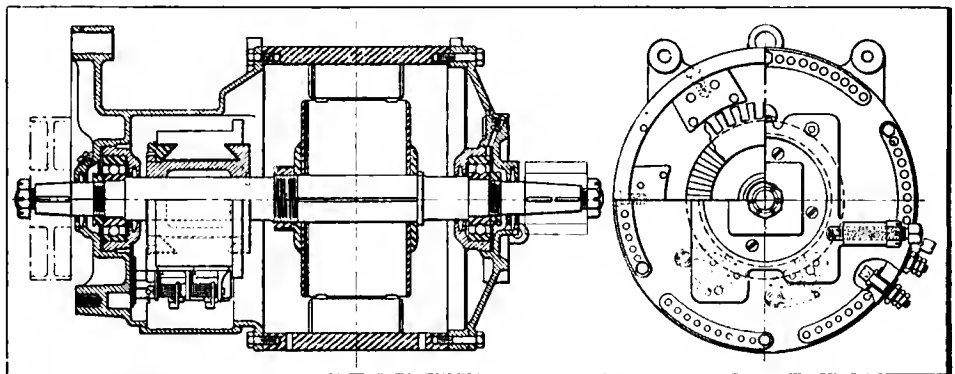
Section of a ball bearing type of electric motor as applied to vehicles
